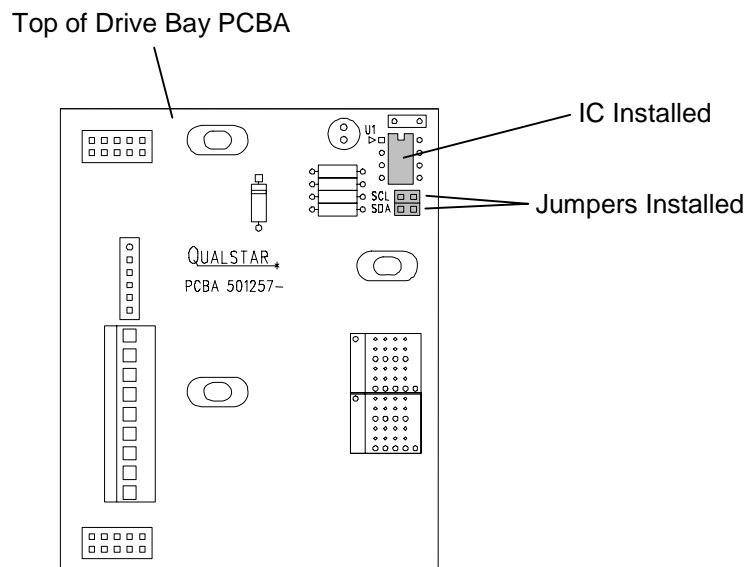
62xx and 82xx Model Drive Bay PCBA Jumper and IC Configuration
